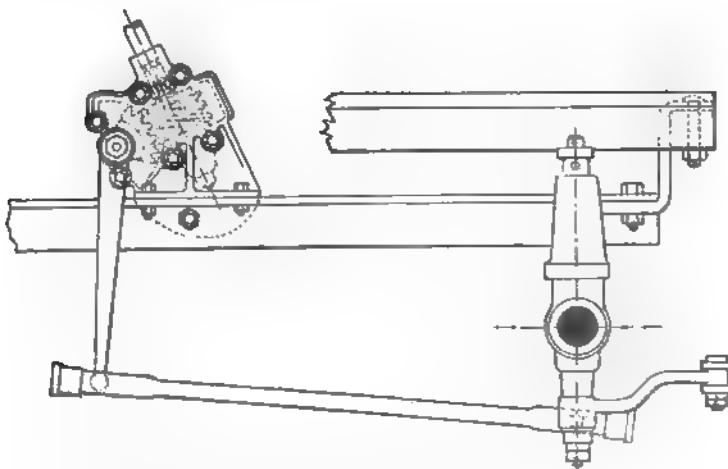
Worm and sector steering device, as developed by Panhard-Levasor. The spindle of the steering hand wheel carries a worm gear at its base, which actuates a toothed sector, as shown. This swings an arm and moves the drag-link attached to the arm at the base of the steering head. The transverse drag-link connecting the two steering heads is attached to the arm extending from the front of the carriage. The link between the steering head and the sector arm has ball joints and can adjust the distance as the carriage rises and falls on the springs.
